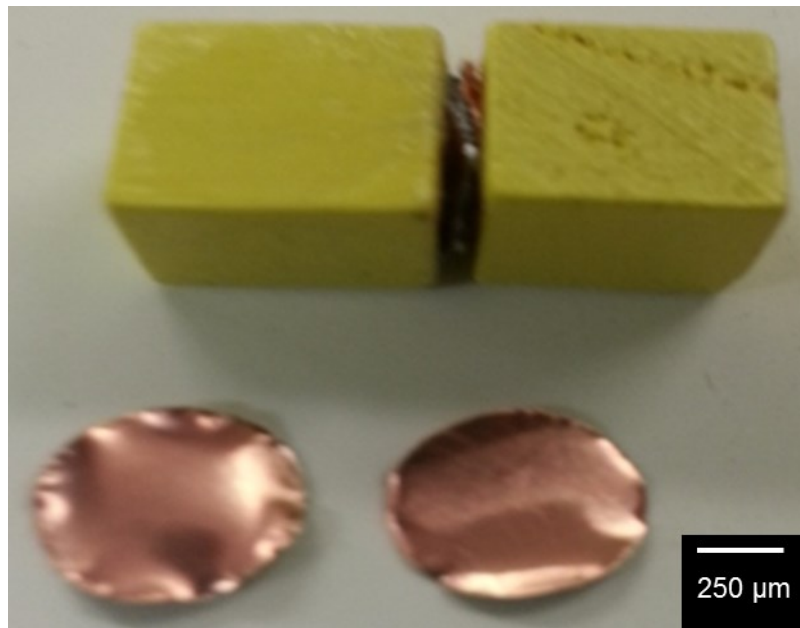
Linearly Assembled 500-micron Cubes. A pattern directed assembled cube connected by lead-tin low melting point solder.
